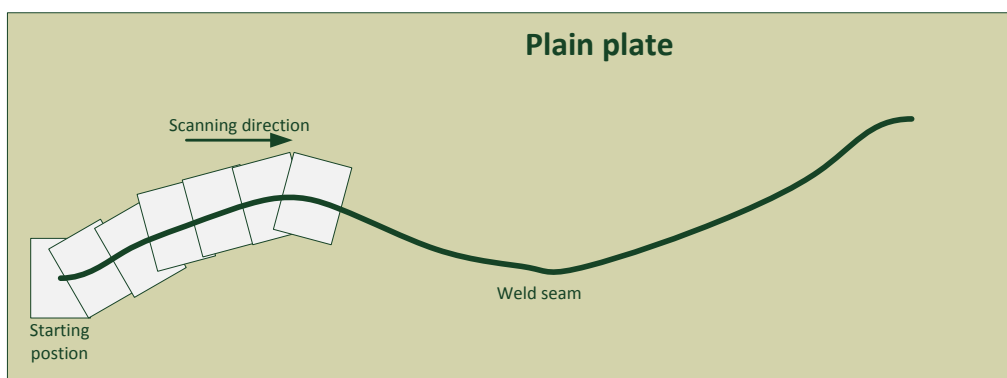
Plain plate with weld seam showing the captured images used for seam tracking.
